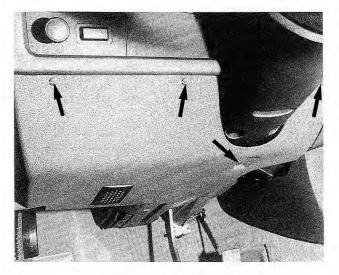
Retaining screws (arrows) to be removed from leftside instrument panel trim.
